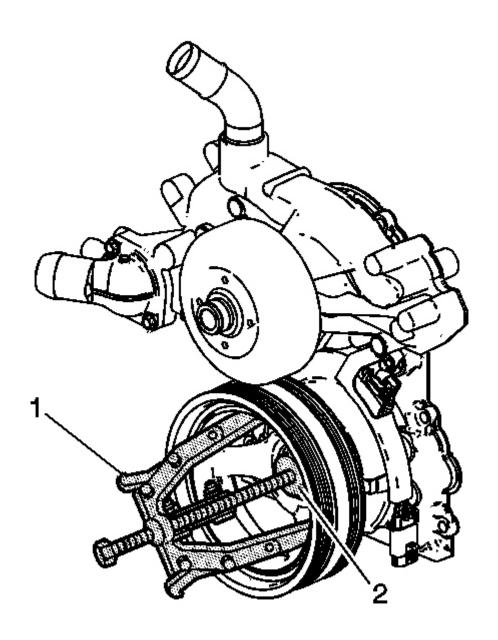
Removing Crankshaft Balancer Courtesy of GENERAL MOTORS CORP.
